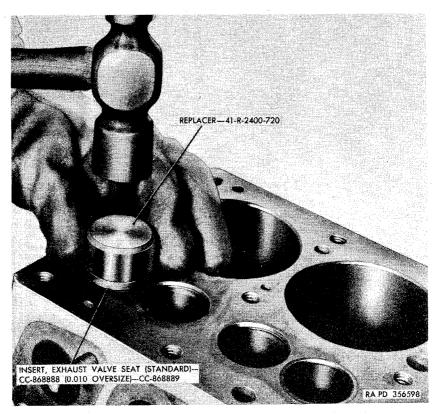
Installing exhaust valve seat insert. speed grinder in the same manner as indicated for the exhaust valve seats. The seats should be ground only enough to remove pits or other depressions. Valves and seats should then be lightly lapped together with valve grinding compound.
